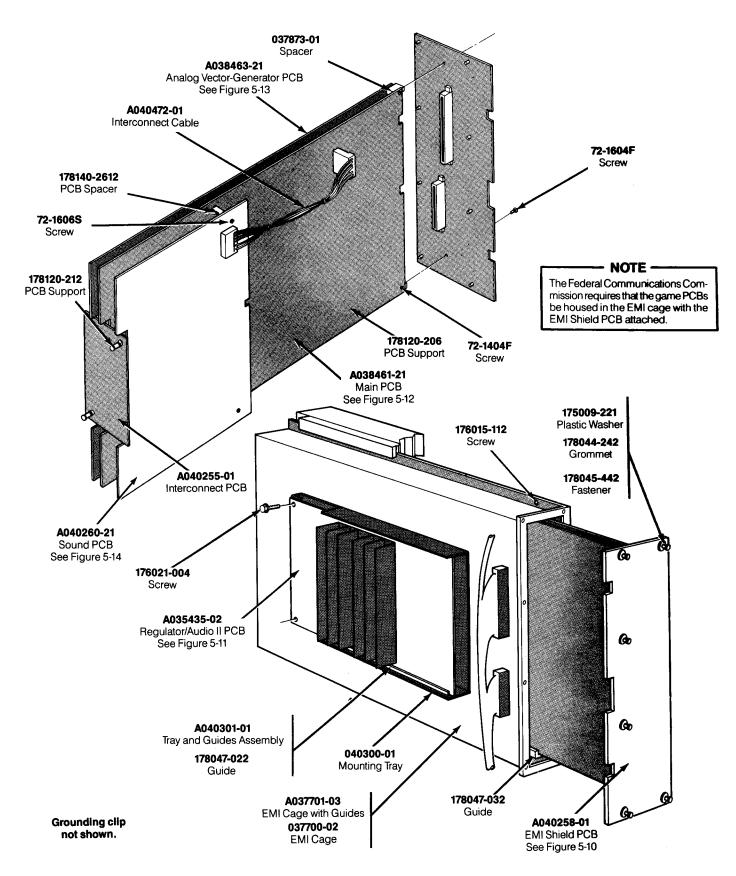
A PCB Mounting Hardware US-Built Cabinet
